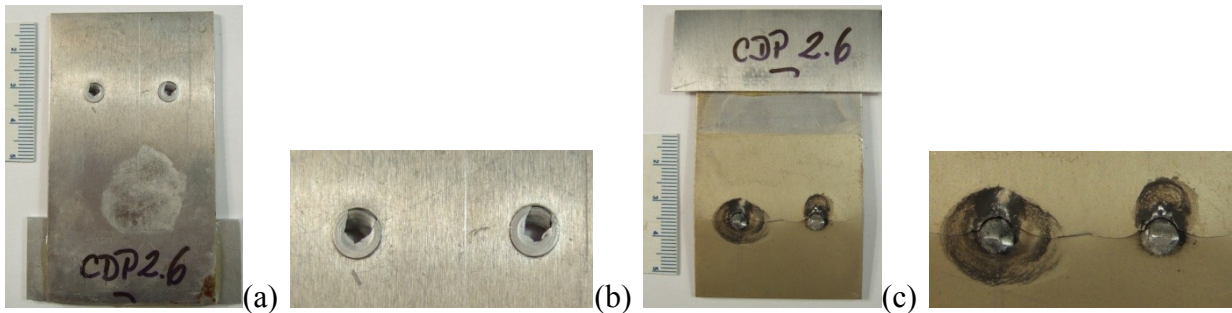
(a) Outer face of countersunk Al-alloy sheet of the Al-GI joint (B); (b) Magnified view; (c) Inner face of flat-bottom hole Glare sheet; (d) Magnified view.
